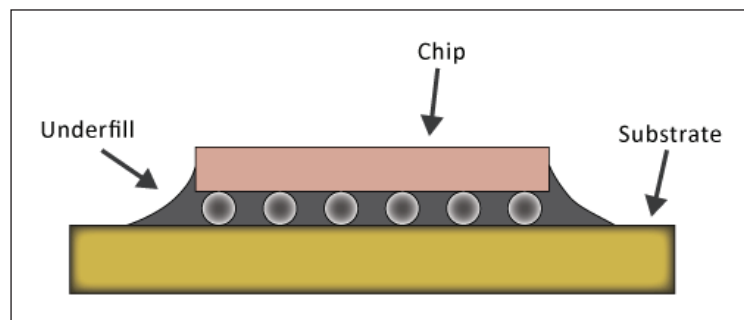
Flip Chip Assembly with Underfill ⁽¹⁾
